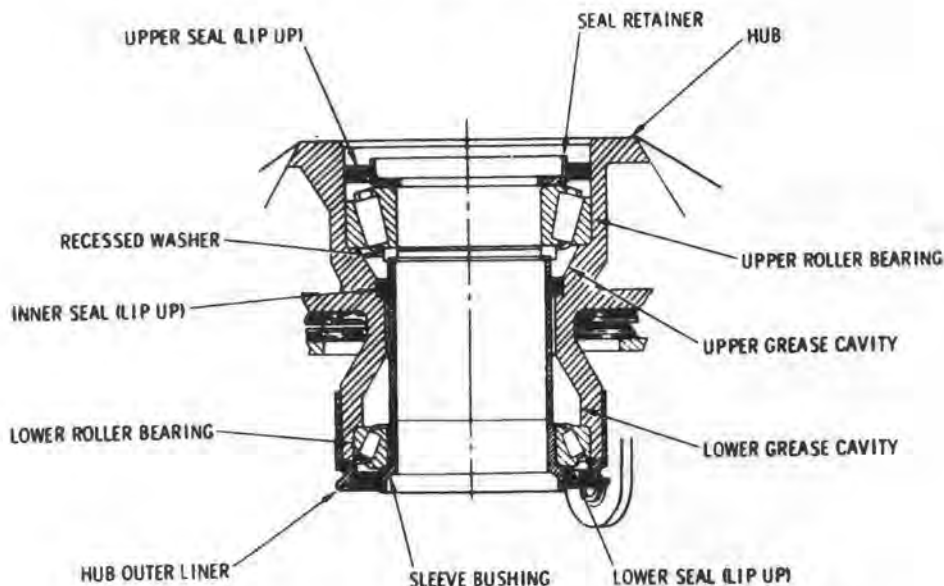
Hub Assembly Cross Section. (sheet 2 of 2)
